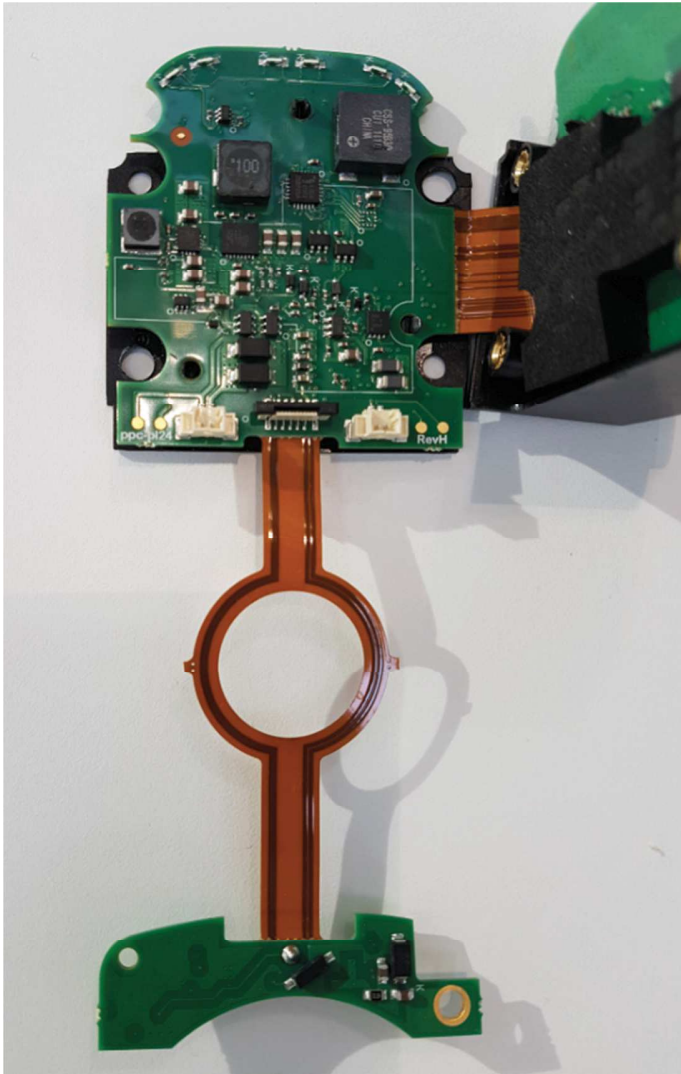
Front view of Radio Module removed from main housing with cover removed
